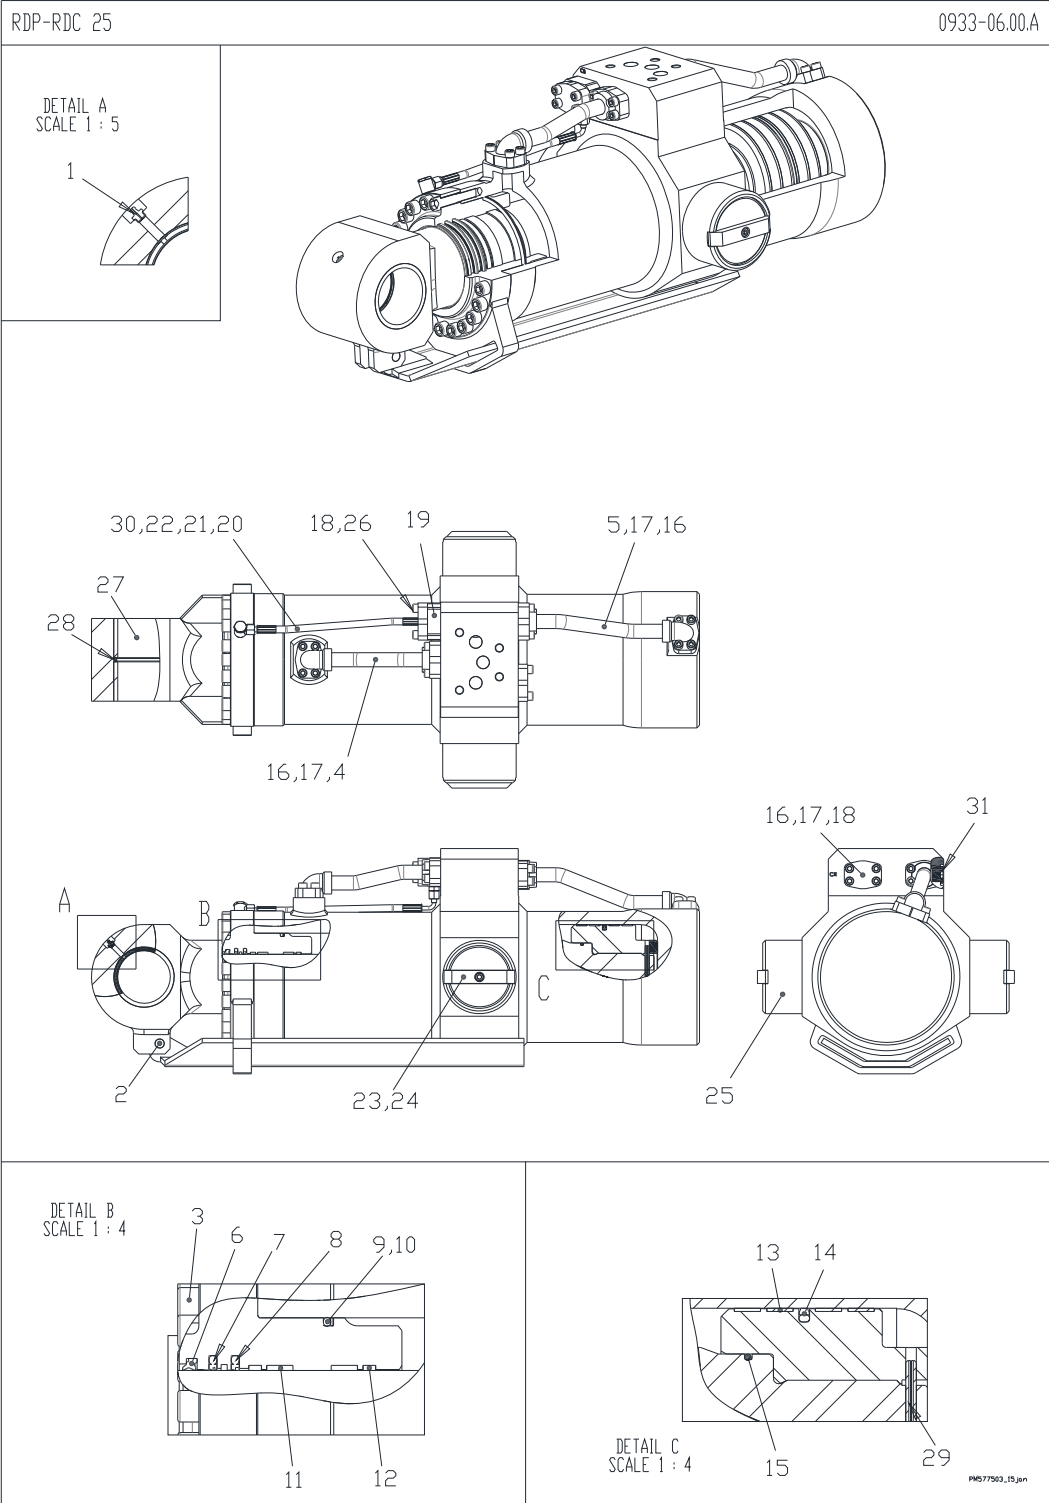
(0933-06.00.A) Figure exclusive to RDP25 only.
